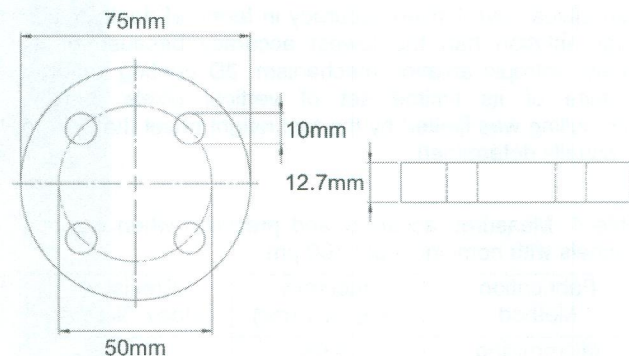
Dimensioned drawing of blind flange created by test process chain.
